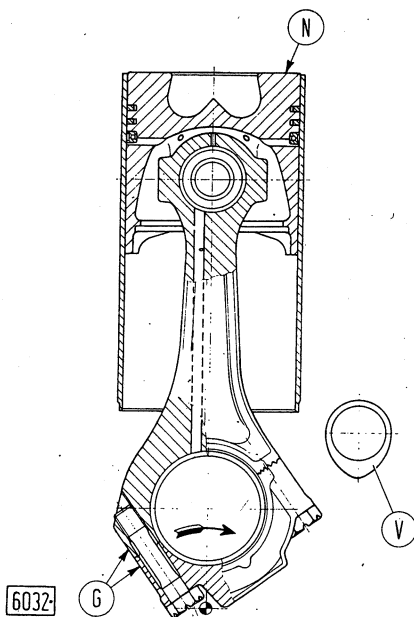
Cross-sectional view of one connecting rod-piston unit with assembly reference with respect to the camshaft (V).
